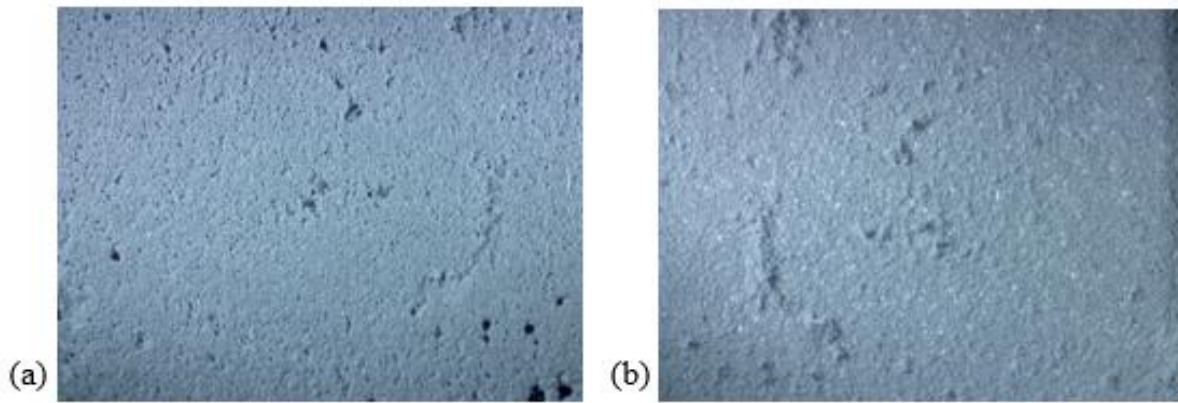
Fracture surfaces of (a) composite lower adherend and (b) metal upper adherend.
